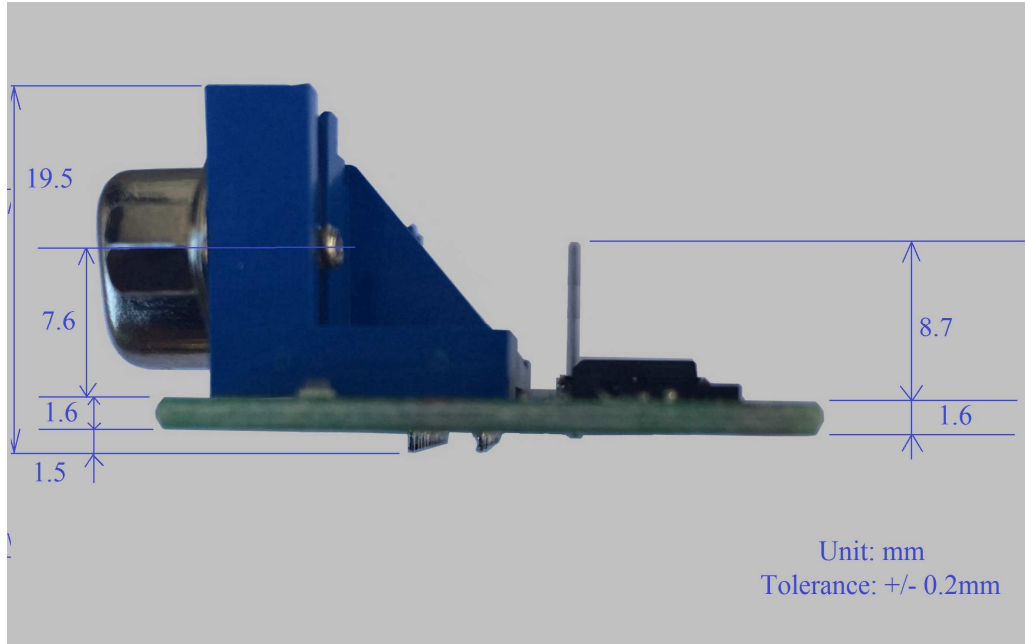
GPIB to UART Module Mechanic Size (side view)
